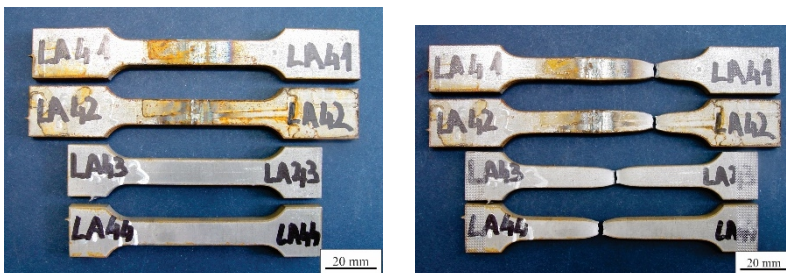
Tensile test specimens LA-4, welded with argon and base metal: (a) before and (b) after the tensile test
